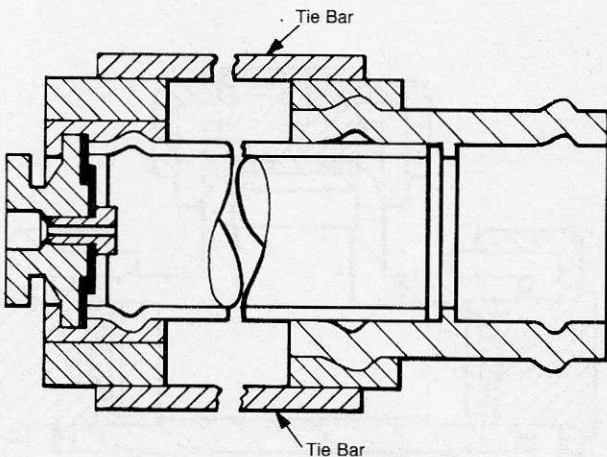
Typical end cap for integral joint incorporating an elastomeric sealing ring
